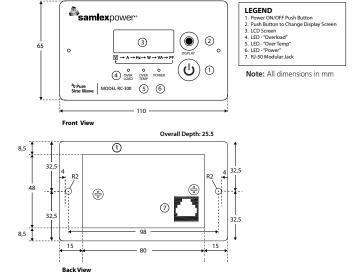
Remote Control RC-300 - Layout and Dimensional Drawing
